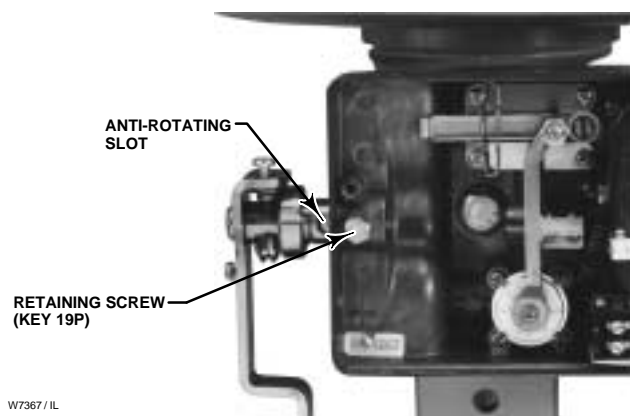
Installing the Feedback Lever Assembly (Key 19) on the Positioner
